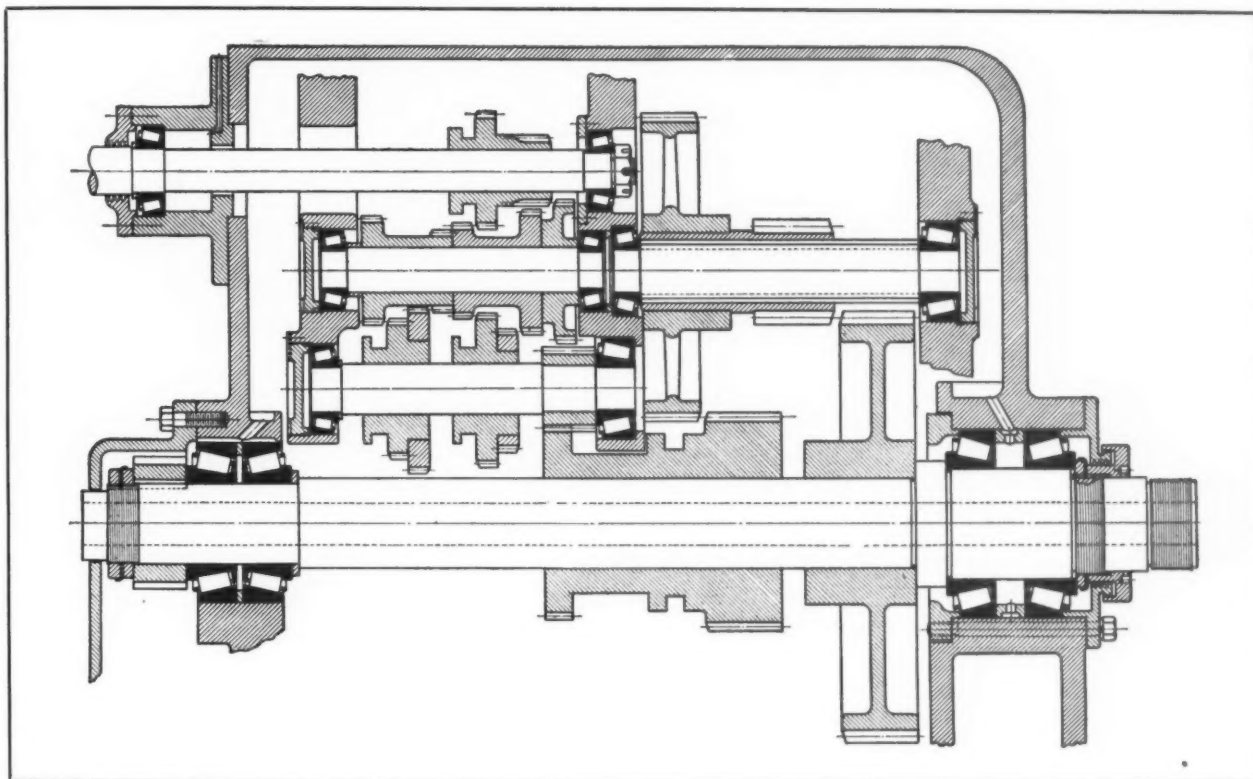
Lathe Spindle Mounted in Two Roller Bearings at Each End
